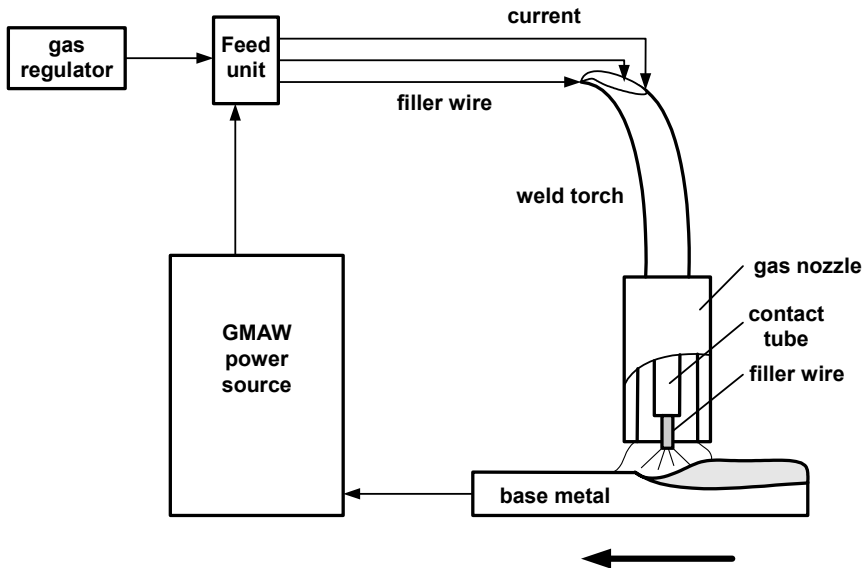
Schematic representation of gas metal arc welding process (GMAW)
